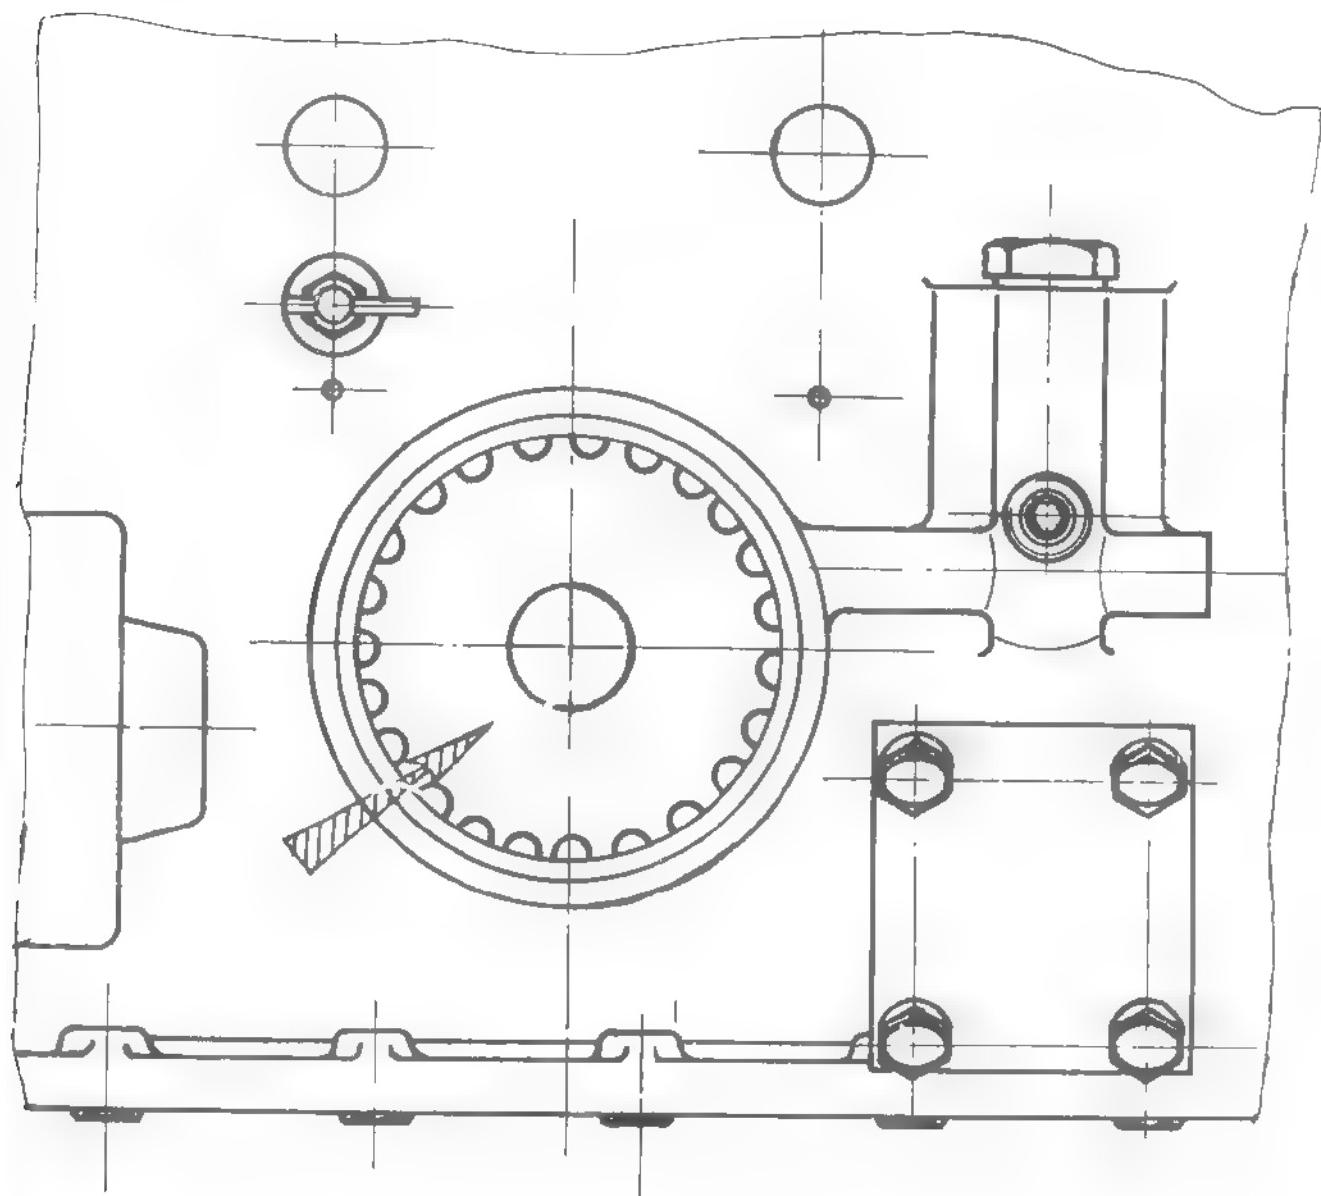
ARO L-25 ENGINE OIL FILTER
